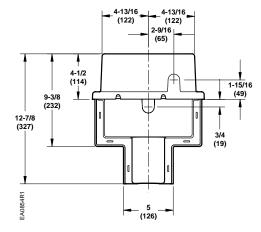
Dimensions of the 599-10071 Weather Shield in inches (mm).
